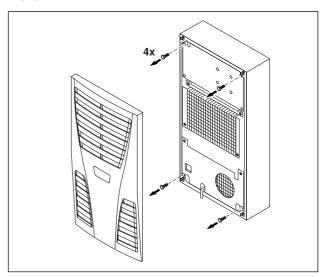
Only for SK 3302.xxx: Remove the four screws
